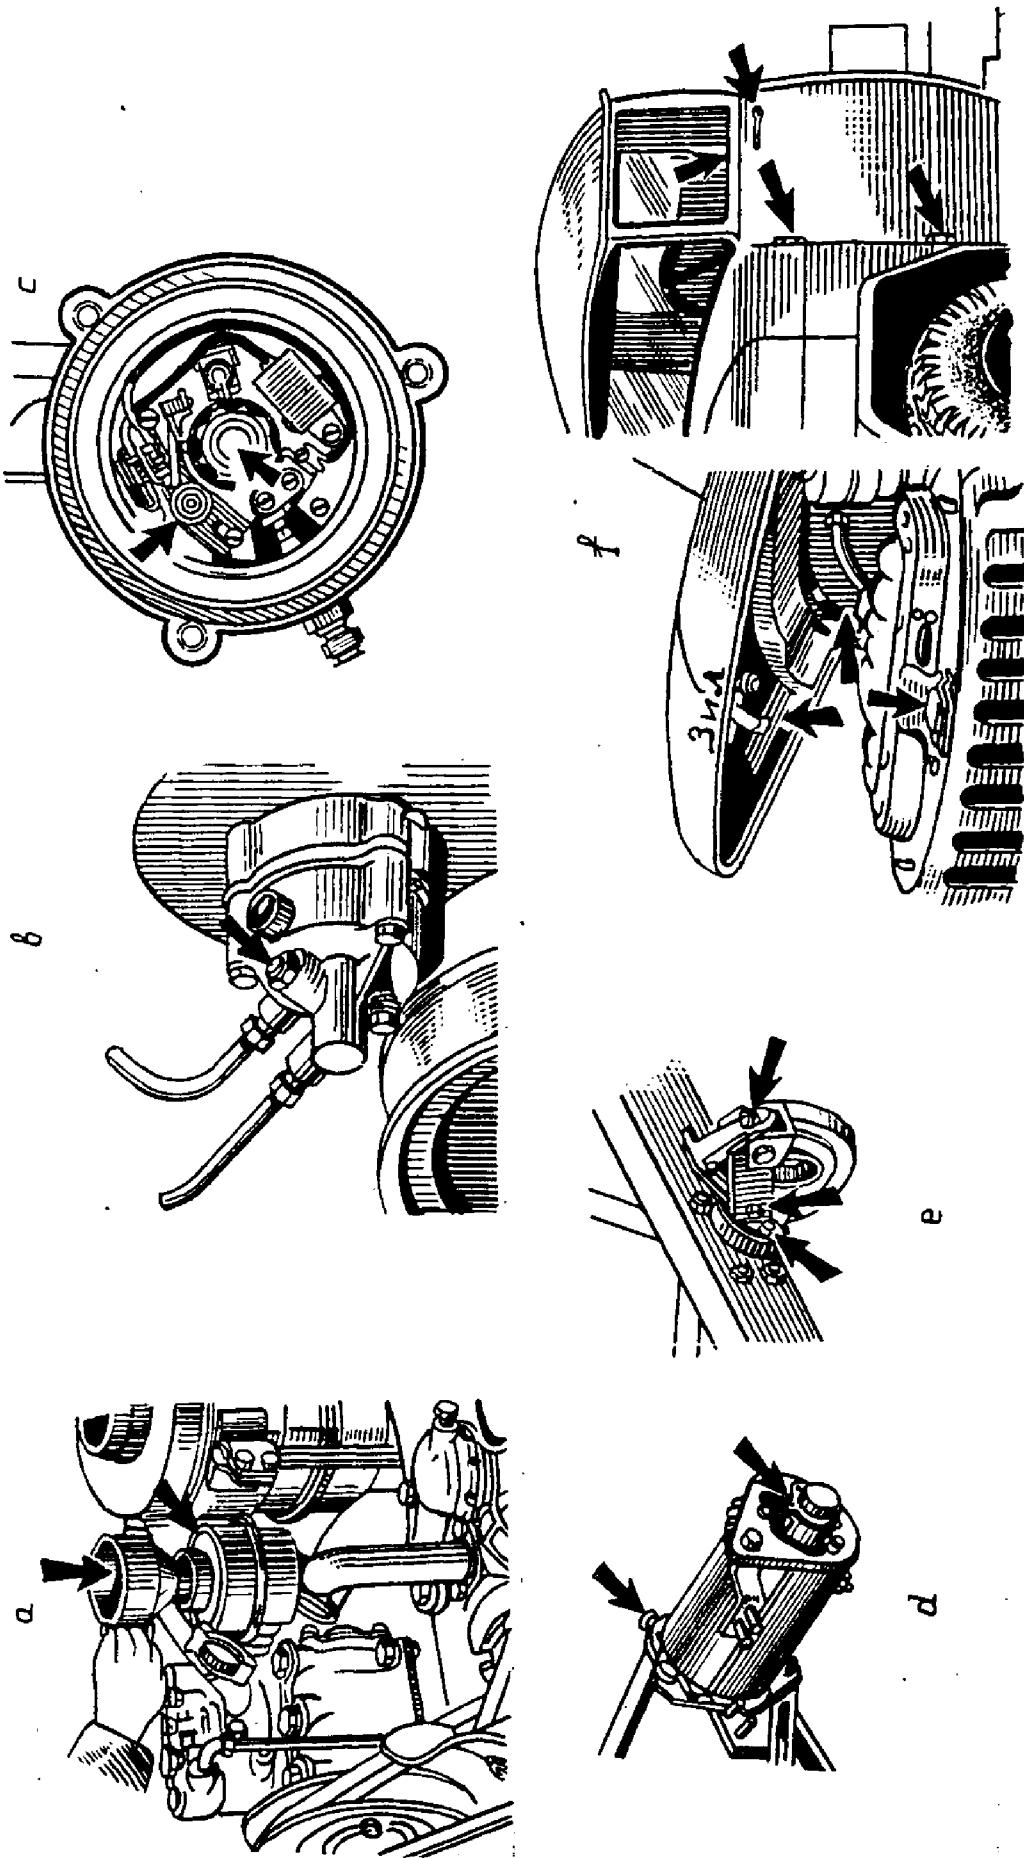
LUBRICATING POINTS FOR AC-8 OR AC-11-10 GREASE
